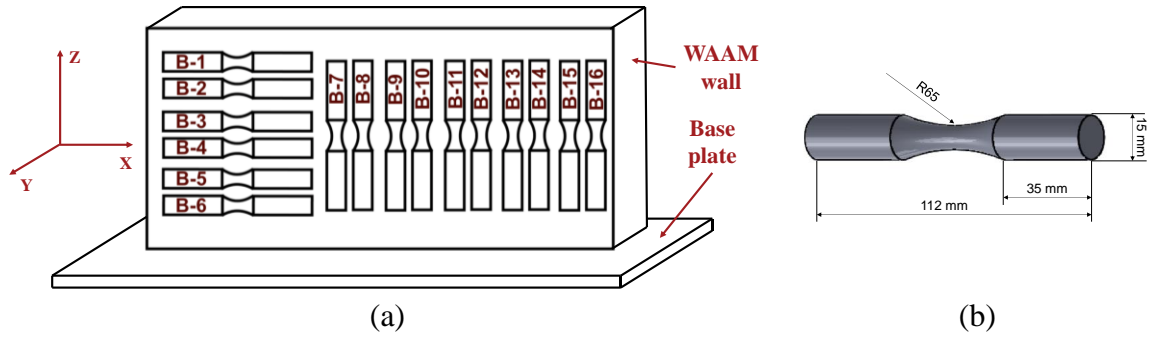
(a) Schematic extraction plan for a WAAM wall, and (b) cylindrical specimen dimensions
